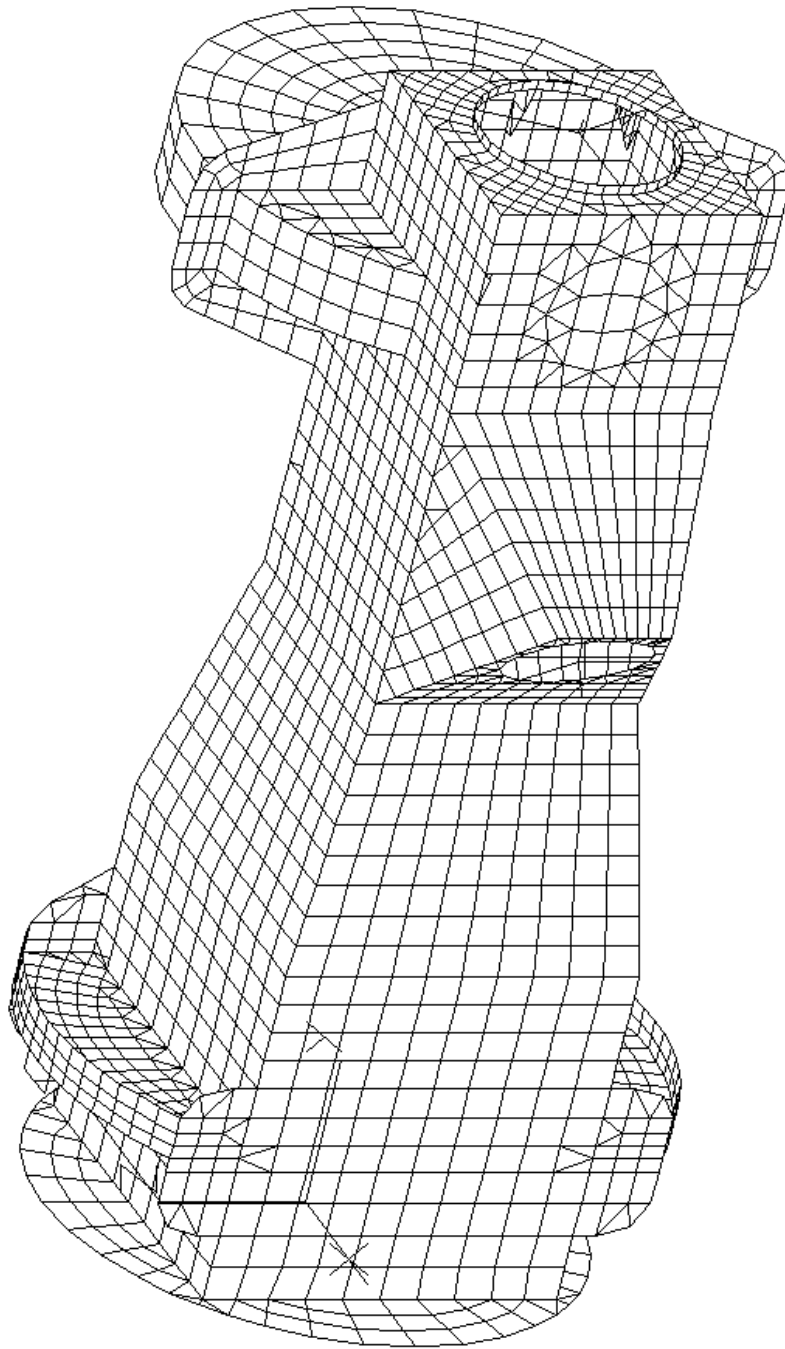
Plate weldment structure by Gunnels. The circular section at the top was for a disperser wheel, the lower disk is the mounting flange.
